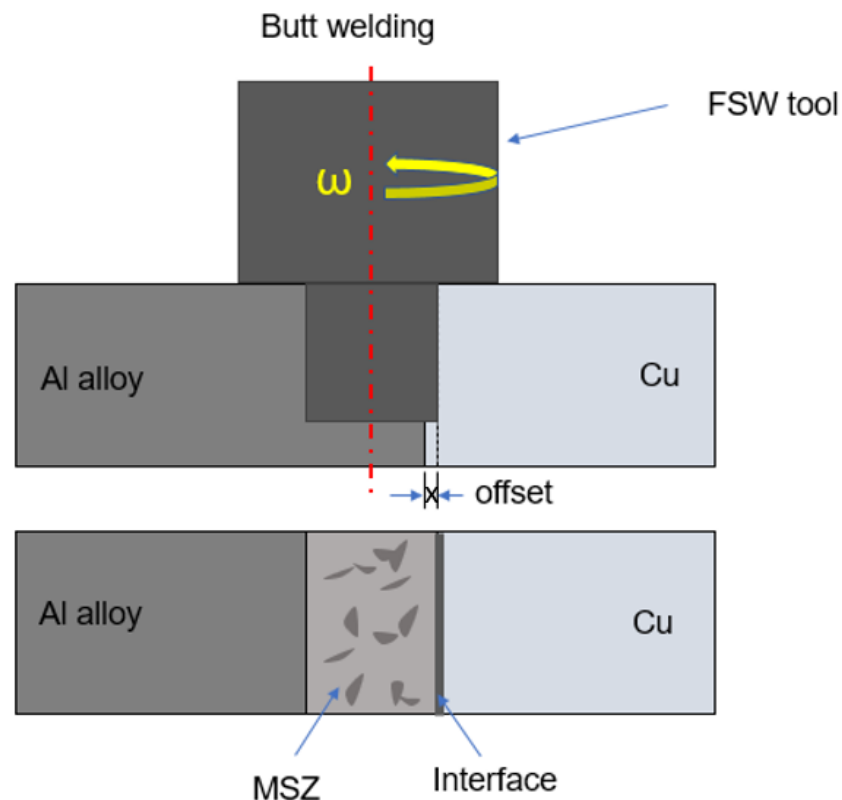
Schematic illustration of FS butt weld showing MSZ and weld interface. Tool offset size x is normally between 0.1-2 mm.
